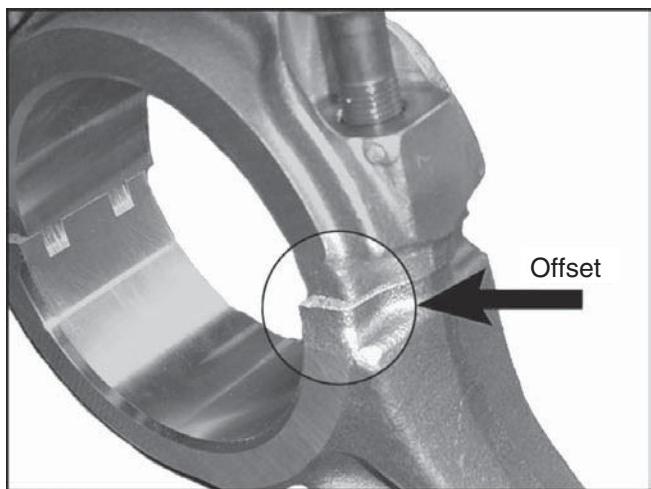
Incorrect rod cap assembly on a cracked/fractured rod assembly. (Courtesy of Navistar)
